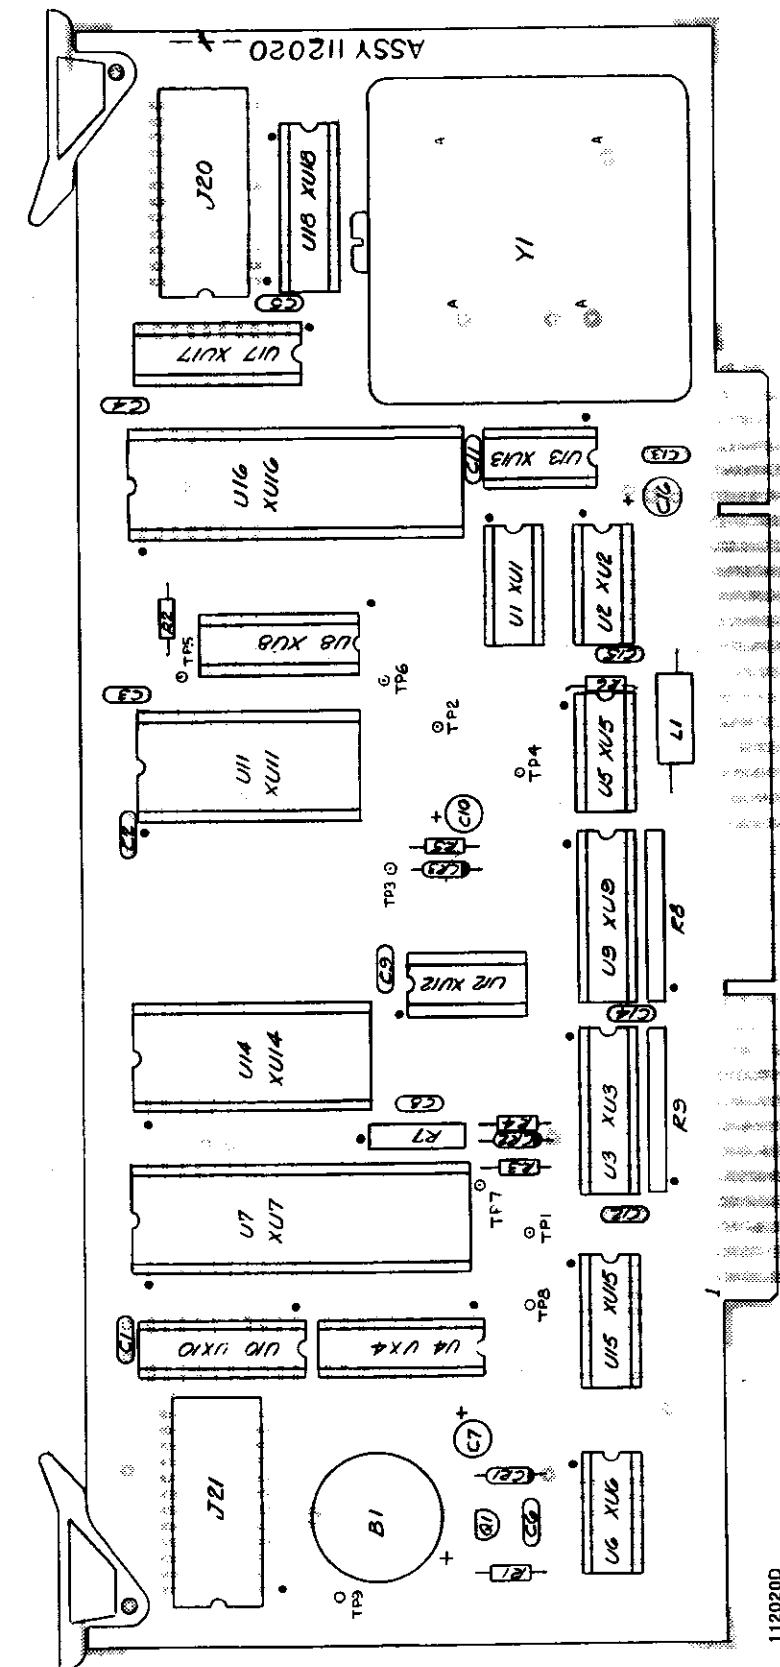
C.P.U. Board A5 Parts Location Diagram.
